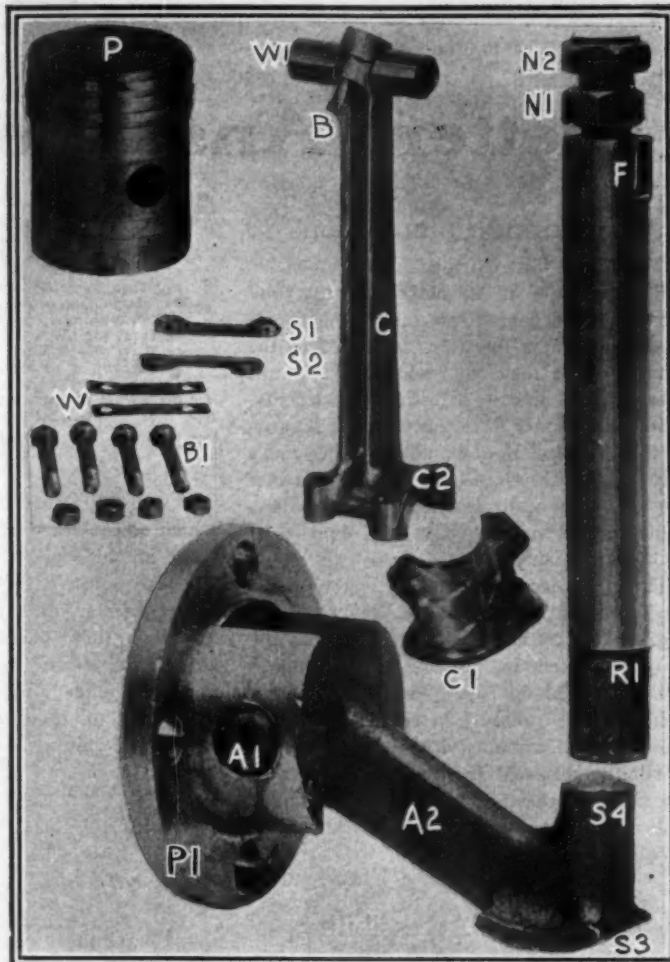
Showing the piston-connecting rod assembly, also valve operating parts
